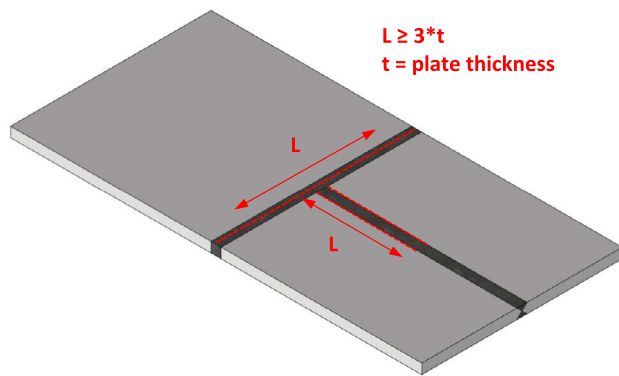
Recommended HFMI treatment zones for the T-butt joint: intermediate transverse weld layer and adjacent longitudinal weld
